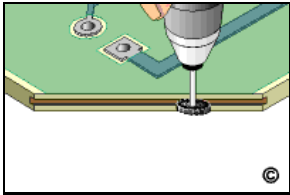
Cut a groove into the edge of the board with a Saw or Slotting Saw Bit.
